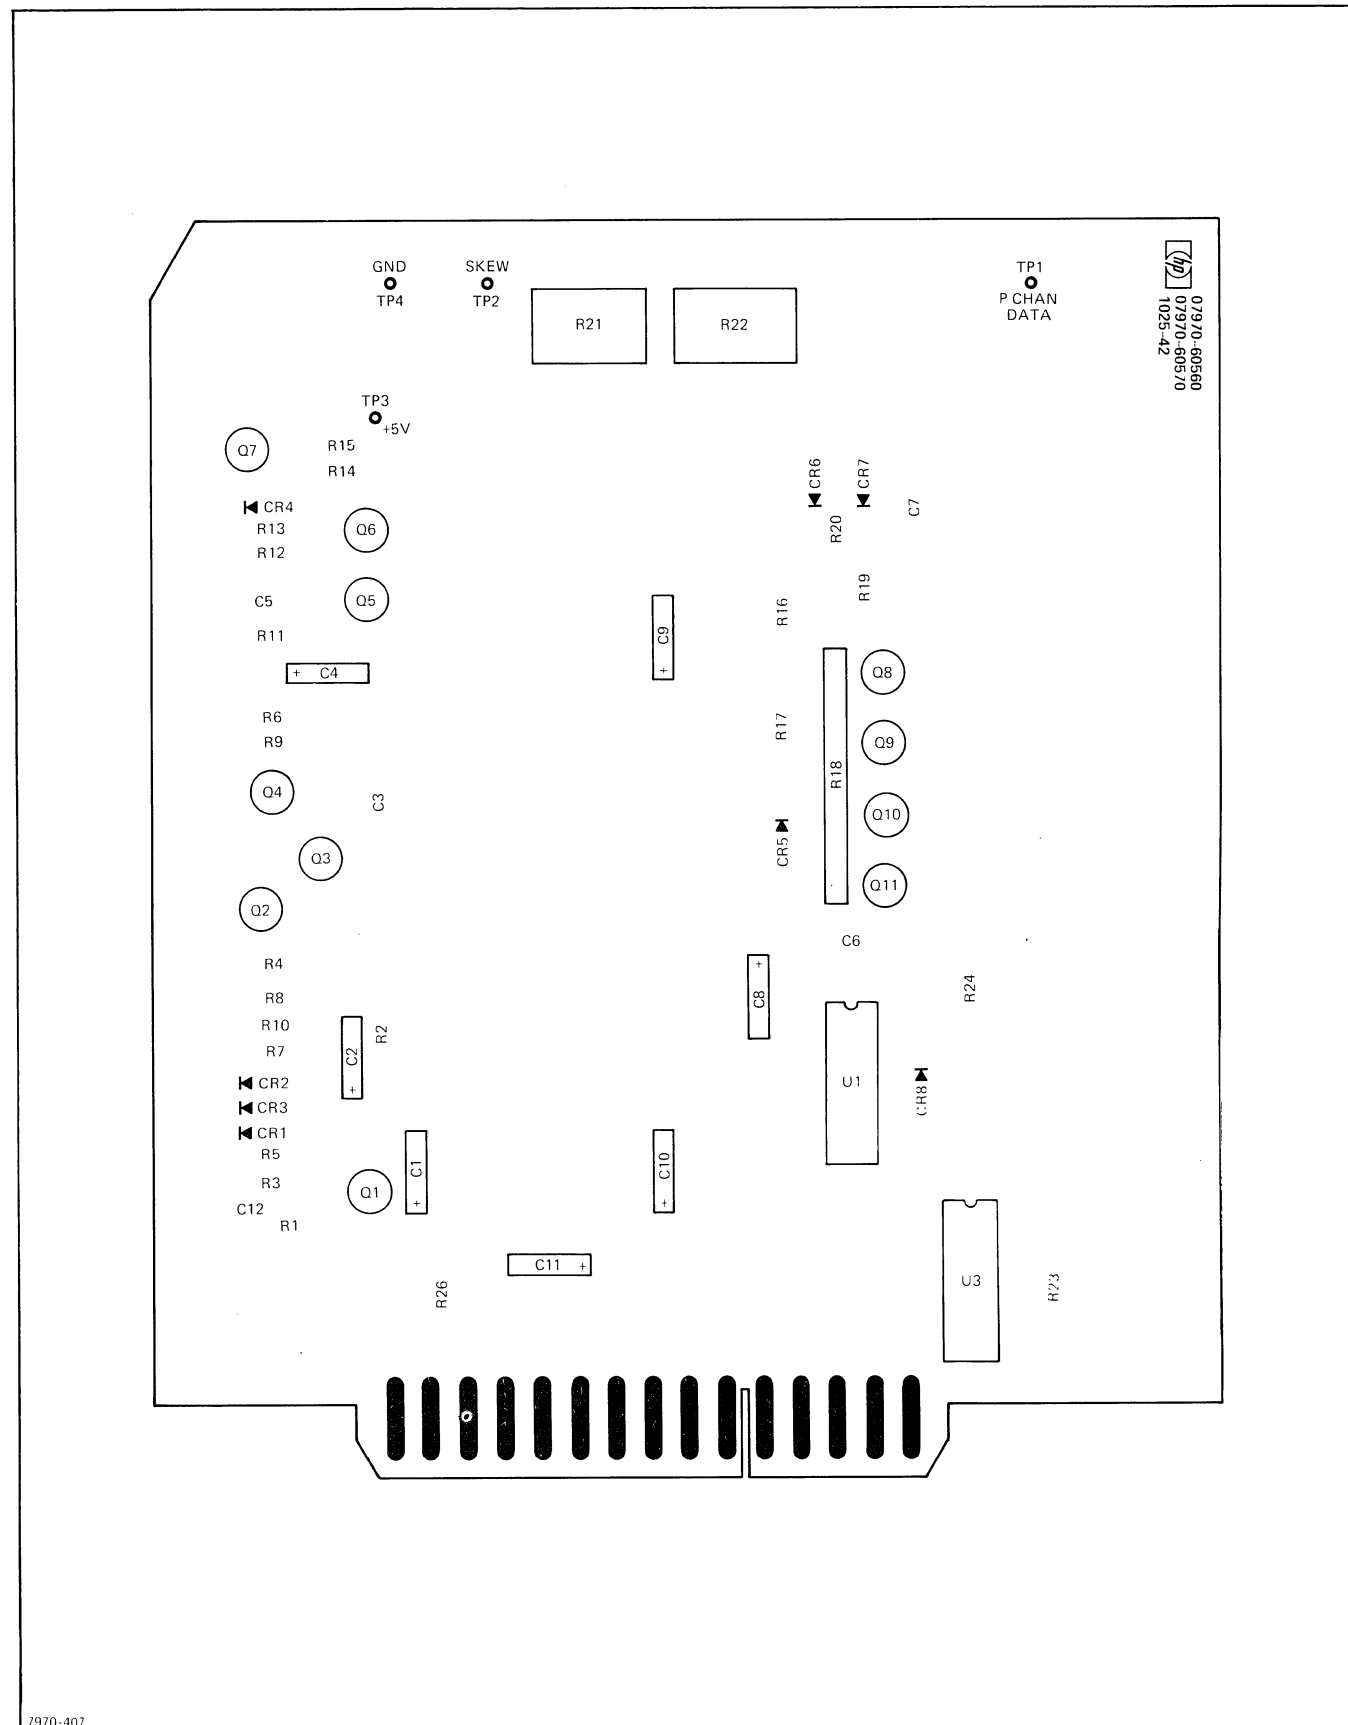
Single-Channel Read Data PC Assembly A18A2, Parts Location Diagram
